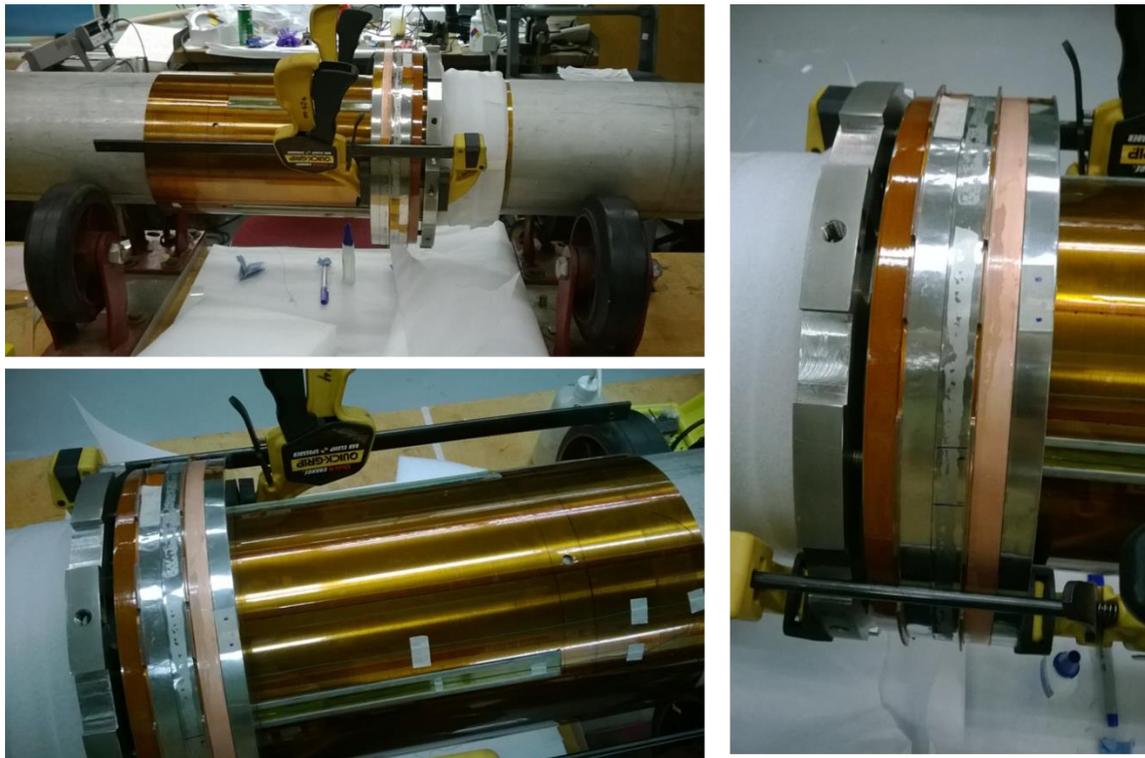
Outer coil being assembled with the HTS pancakes on the inner tube of outer assembly.
